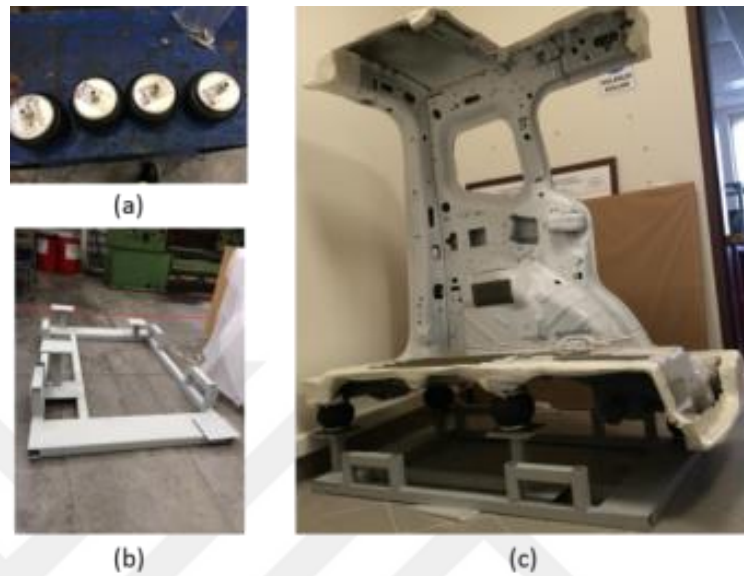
Details of the Quarter BIW assembly a) Air Mounts b) Skid c) Overall assembly
